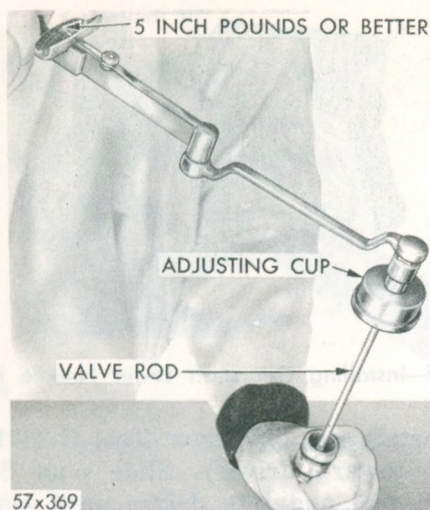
Testing Torque of Adjusting Cup on Valve Rod
